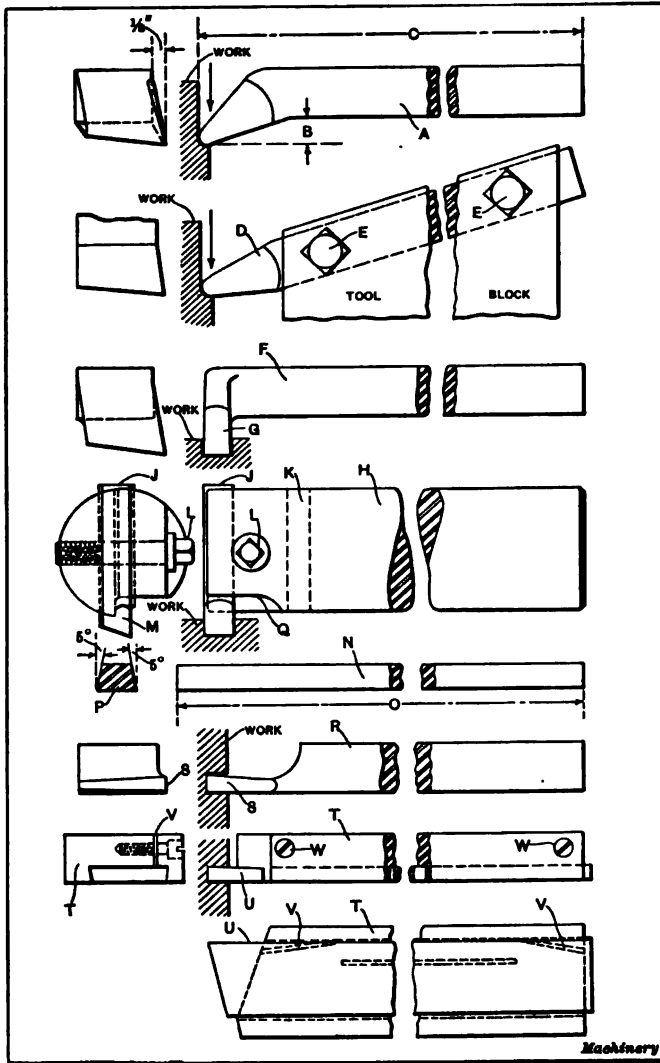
Forged and Inserted-blade Turning and Cutting-off Tools
